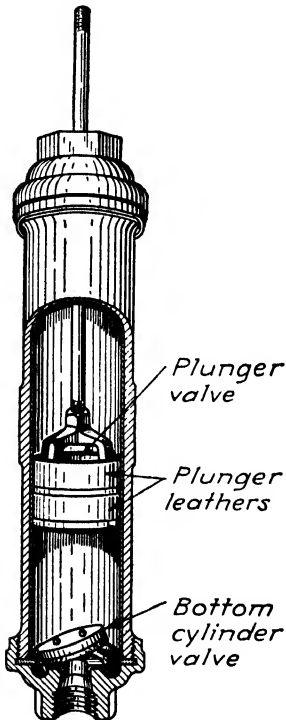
A view showing working parts of a pump cylinder. The most common pump-repair job is the replacement of worn leathers and parts in the pump cylinder.
